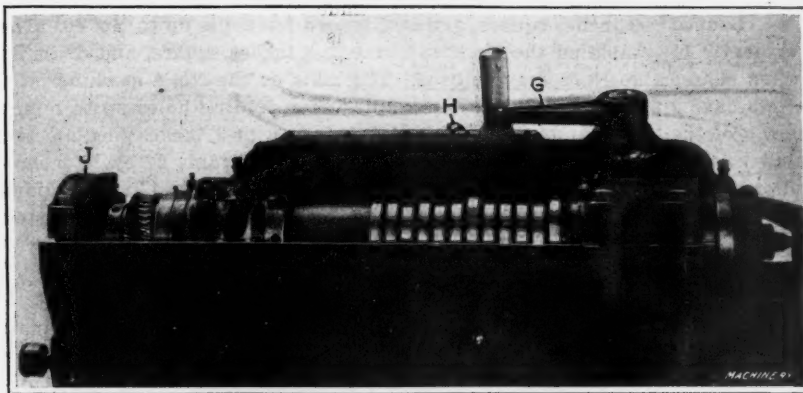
Headstock End of Grinding Attachment with Cover removed, showing Master Cam and Roller used to give Oscillatory Movements to Attachment
